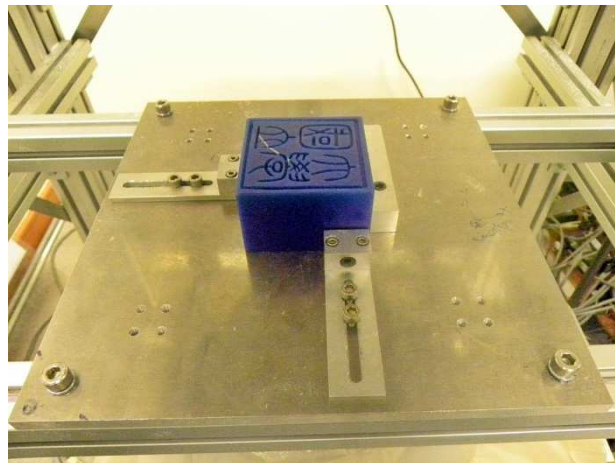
Fixture for holding work-piece on top of the tool-SP
